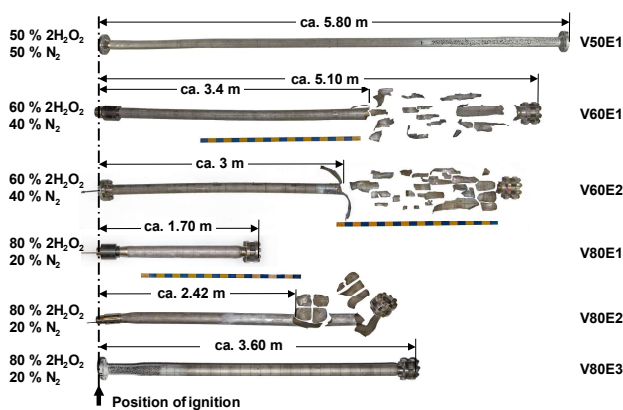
Deformation and fracture of the tested straight pipes with the dimension $O.D. \times t = (114.30 \times 6.02)$ mm
